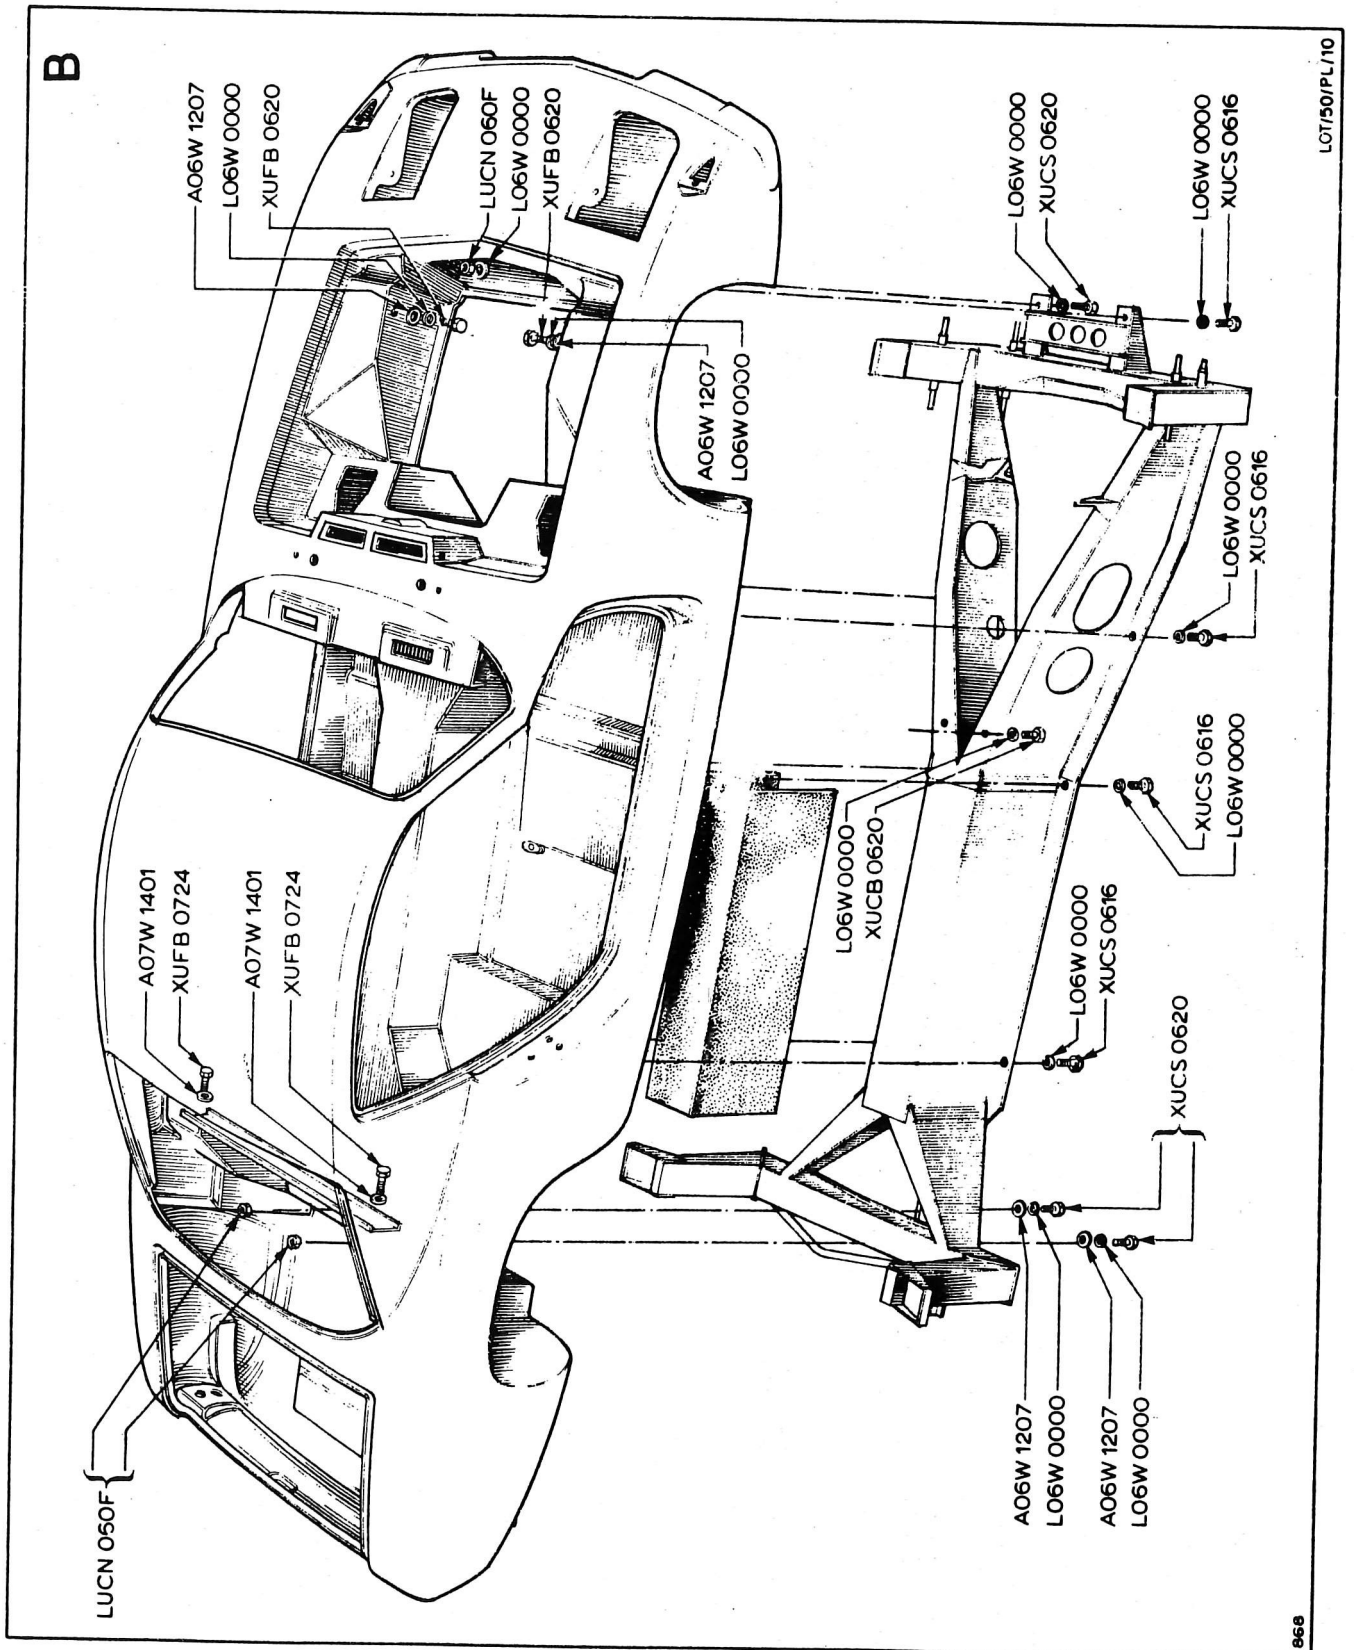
BODY TO CHASSIS ATTACHMENT POINTS
